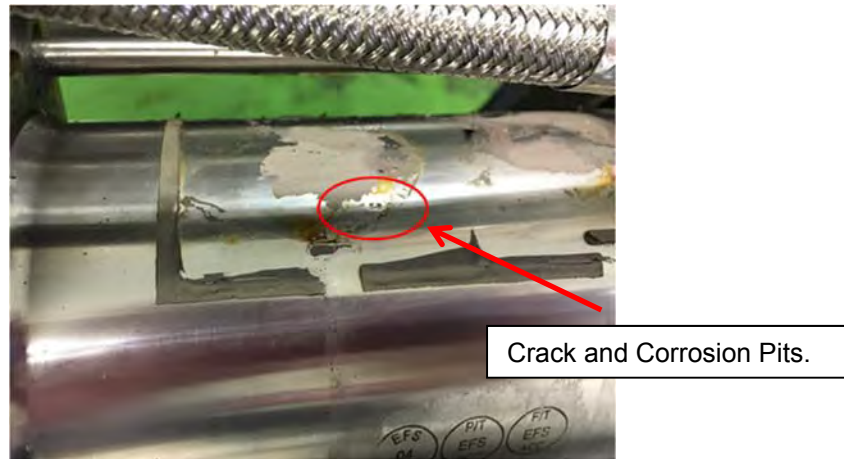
Cylinder Barrel Outer Surface Under the ID Plate (ID Plate Removed)
